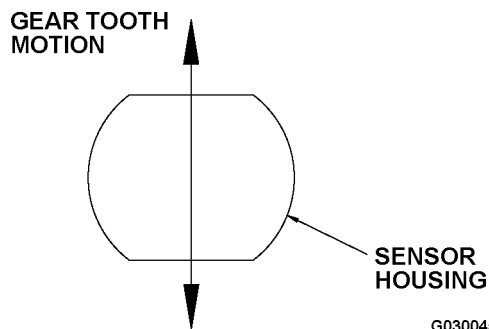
SPEED SENSOR ADJUSTMENT
